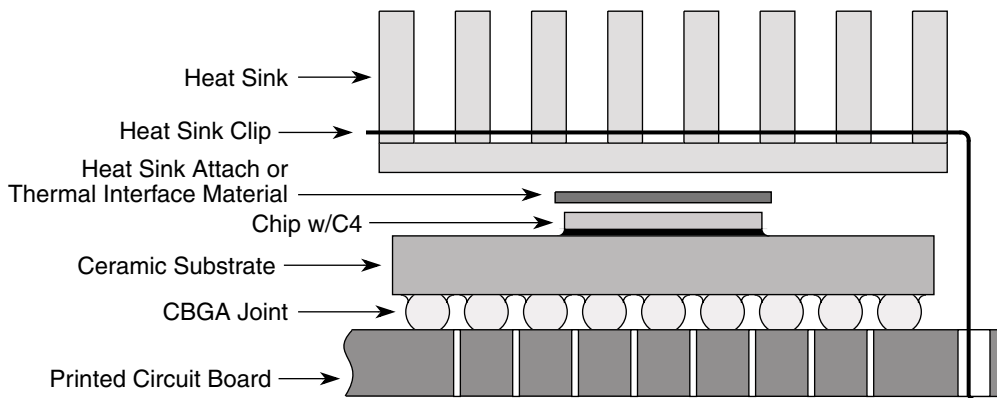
C4/Ceramic-Ball-Grid Array: Exploded Cross-sectional View with Optional Heat Sink (not to scale)
